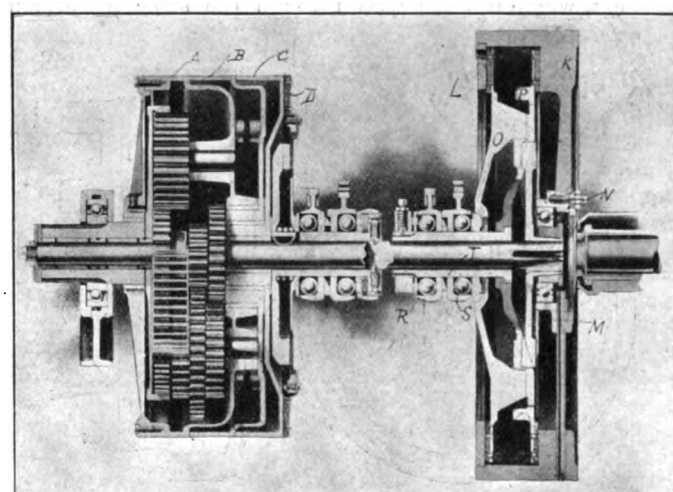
Section of Clutch and Change-speed Gear on Cadillac Car.
